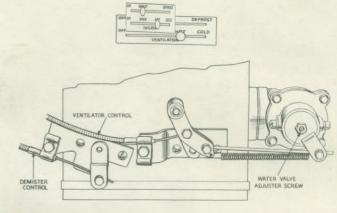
Demister valve partially open, air valve fully open and water valve just beginning to close
